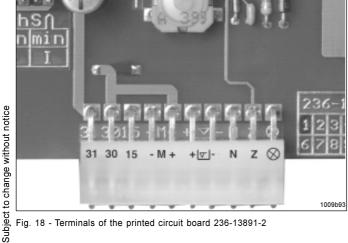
Terminals of the printed circuit board 236-13891-2
